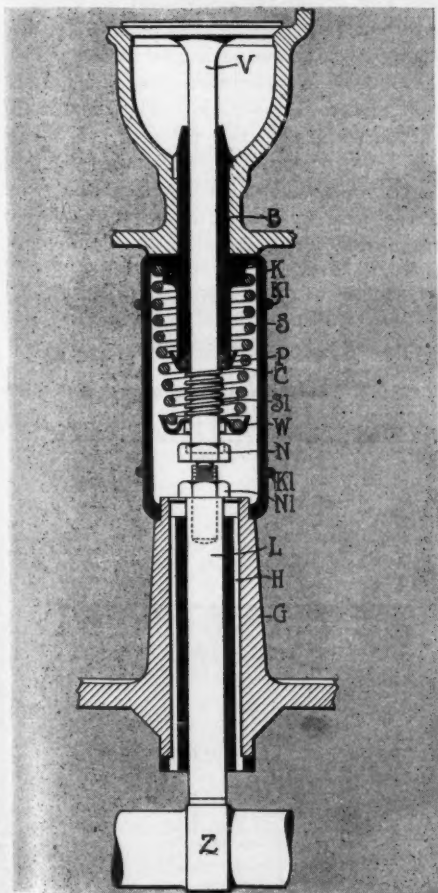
OVERLAND VALVE IMPROVEMENTS. THE PACKING P IS TO PREVENT OIL LEAKING PAST THE VALVE STEM. THE VALVE SPRING COVER K IS MADE IN HALVES AND HELD IN PLACE BY WIRE CLAMPS K1. THE VALVE LIFTER GUIDE G HAS TWO HOLES H TO RETURN THE OIL TO THE CRANKCASE AND SO PREVENT ITS LEAKING OUT PAST THE TOP OF THE GUIDE. NUT N AND LOCKNUT N1 ARE USED TO ADJUST THE LIFTER GUIDES
